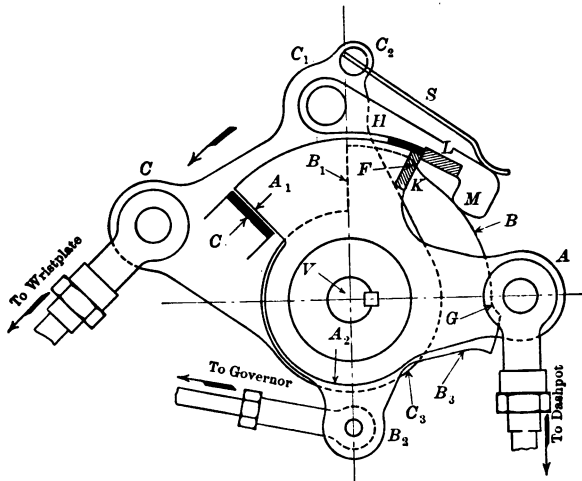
TRIP MECHANISM DETAIL, CORLISS GEAR
